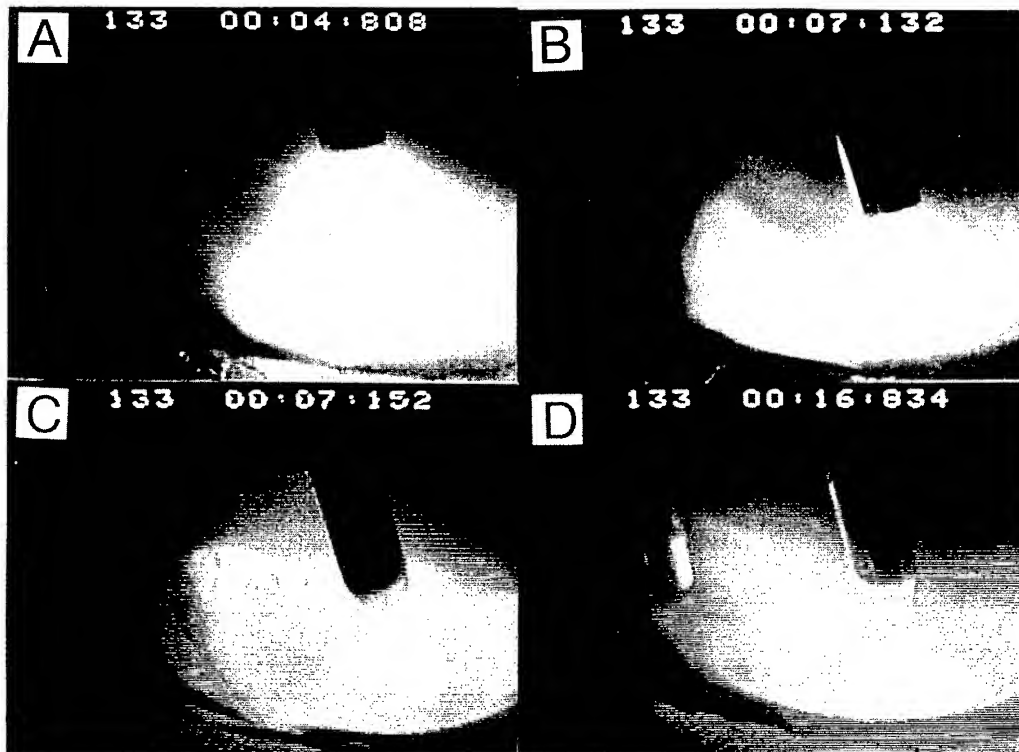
High speed video photographs of the arc and weld pool during recovery from puckering by filler wire feed by DW MIG welding mode
